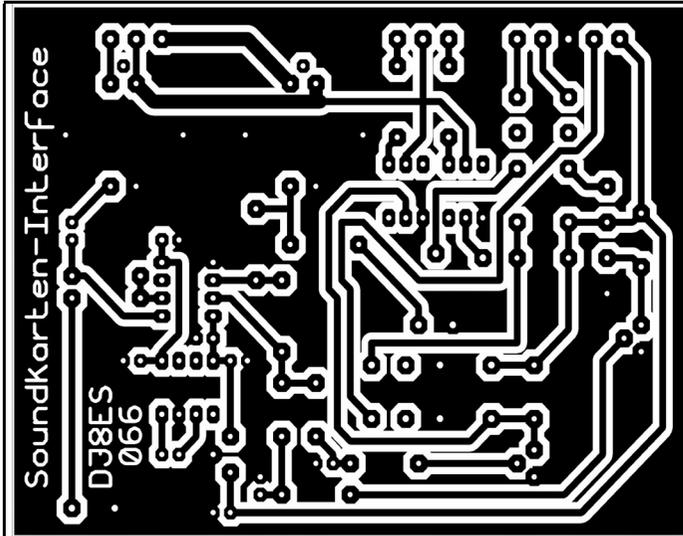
Track side of PCB for universal sound card interface. Board dimensions are 75mm x 100mm.
